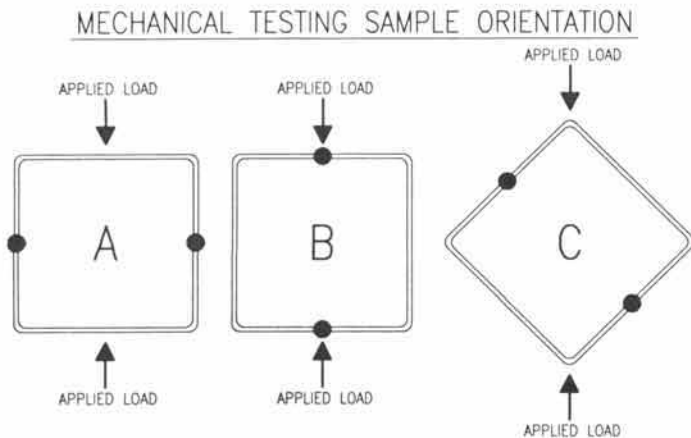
Mechanical testing sample orientation showing three test orientations: a) side-to-side test with welds on the sides (weld is indicated by black dots); b) side-to-side test with welds on the top and bottom; c) corner-to-corner test. The axial test orientation with the load applied along the longitudinal axis of the channel is not shown.
